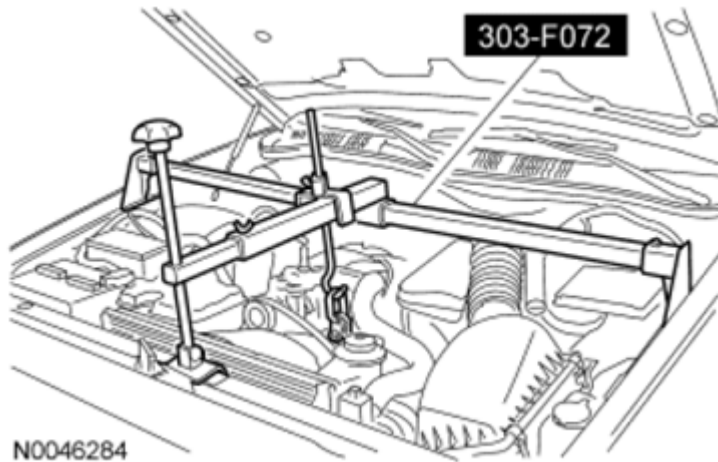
Identifying Engine Lifting Bracket (303-050)
